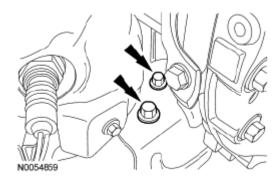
Locating LH Catalytic Converter Bracket Bolts Courtesy of FORD MOTOR CO.
